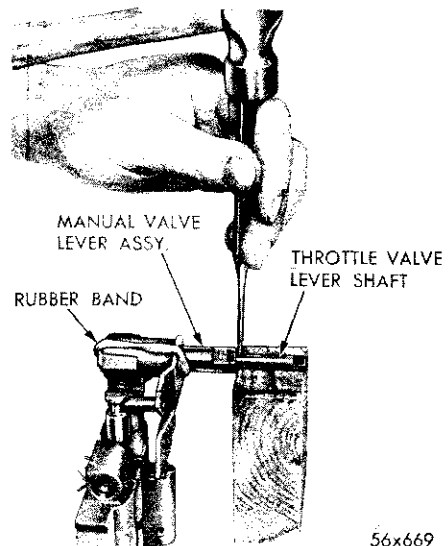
Removal and Installation of Throttle Valve Lever Shaft Pin (Typical View)
